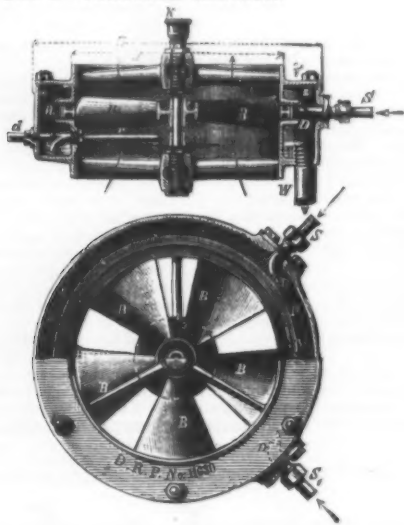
HORIZONTAL SECTION AND PLAN VIEW.
